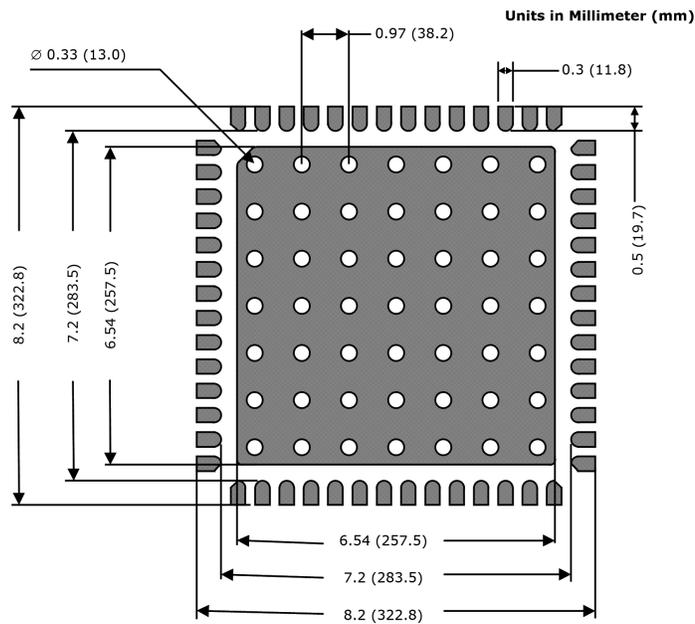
• Top-Layer Solder Paste and Vias PCB Layout for Thermal Pad Array
